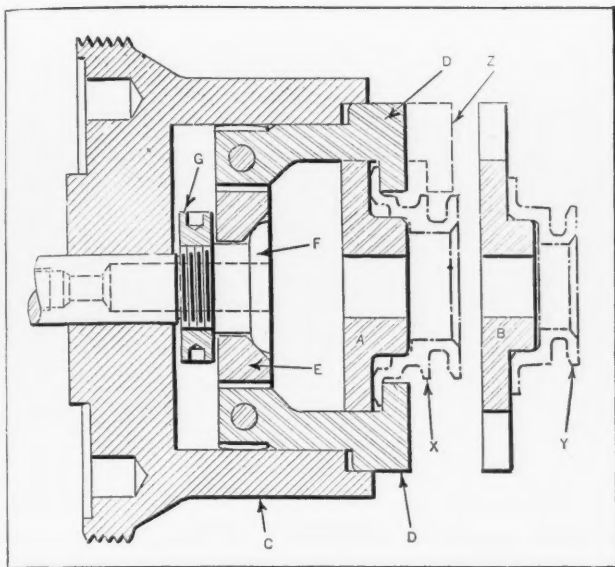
Lathe Chuck Designed for Holding Two Different Parts
